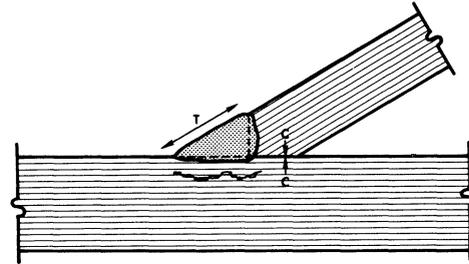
Example of fit-up restraint with large single fillet weld
